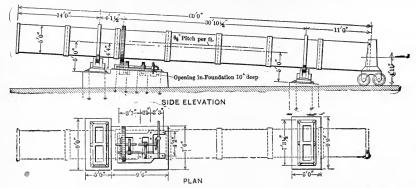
Plan and elevation of 60-foot rotary kiln. (Engineering News)
